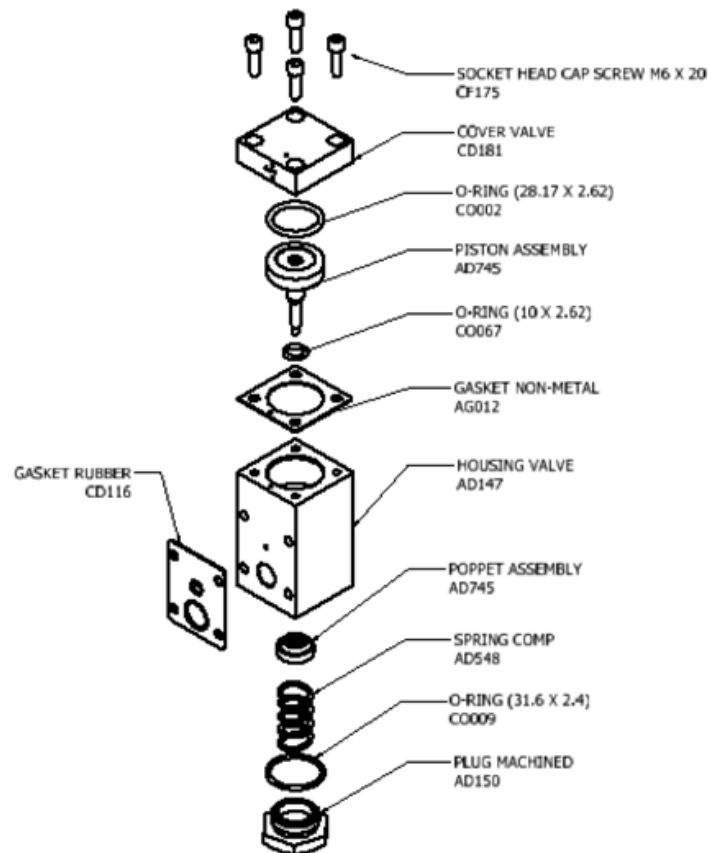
Exploded view of exhaust valve- Dryspell Plus models 20 and 30
